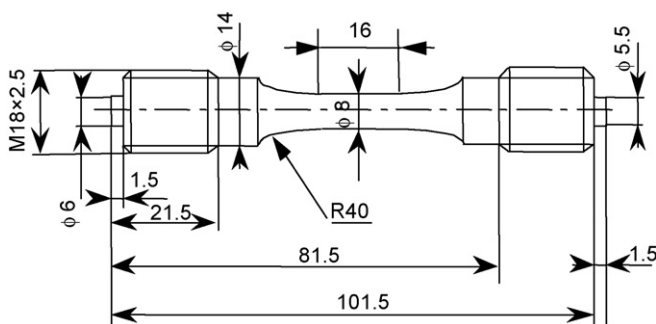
Geometry of uniaxial creep-fatigue test specimen (dimensions in mm).
